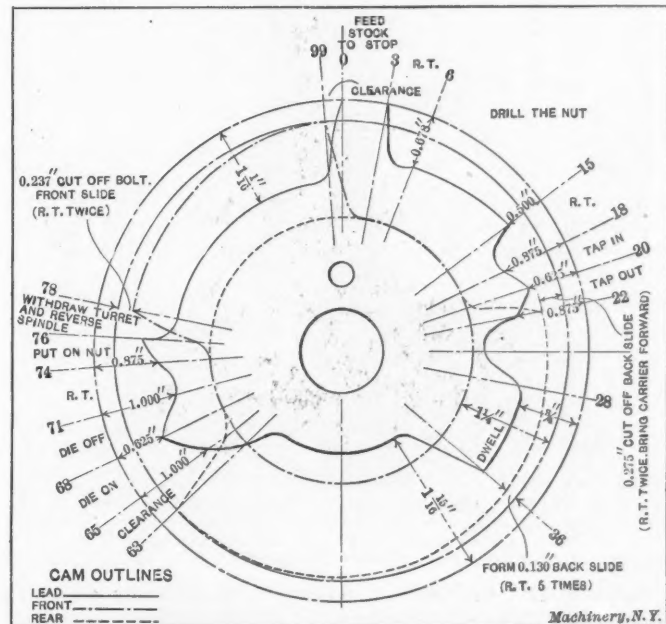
Cams used for Making and Assembling the Nut and Bolt
